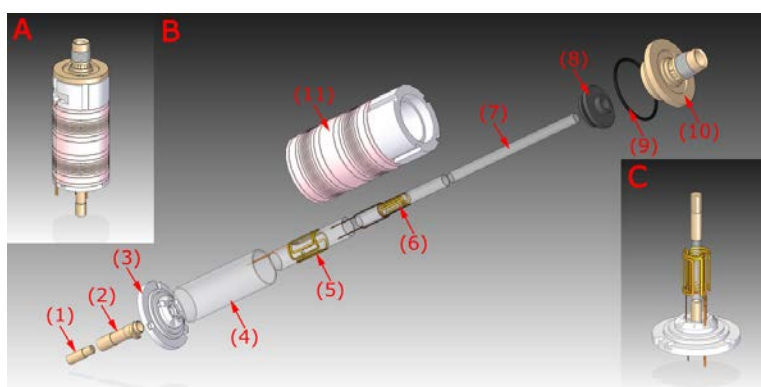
Schematic views of the upper part of the shuttle probe. A. Complete view. B. Exploded view. C. Coil assembly with amorphous quartz shuttle container. (1) Shuttle touchdown pad. (2) Lower attenuating connector. (3) Lower insert. (4) Thermal glass shield. (5) Guiding glass tube and
